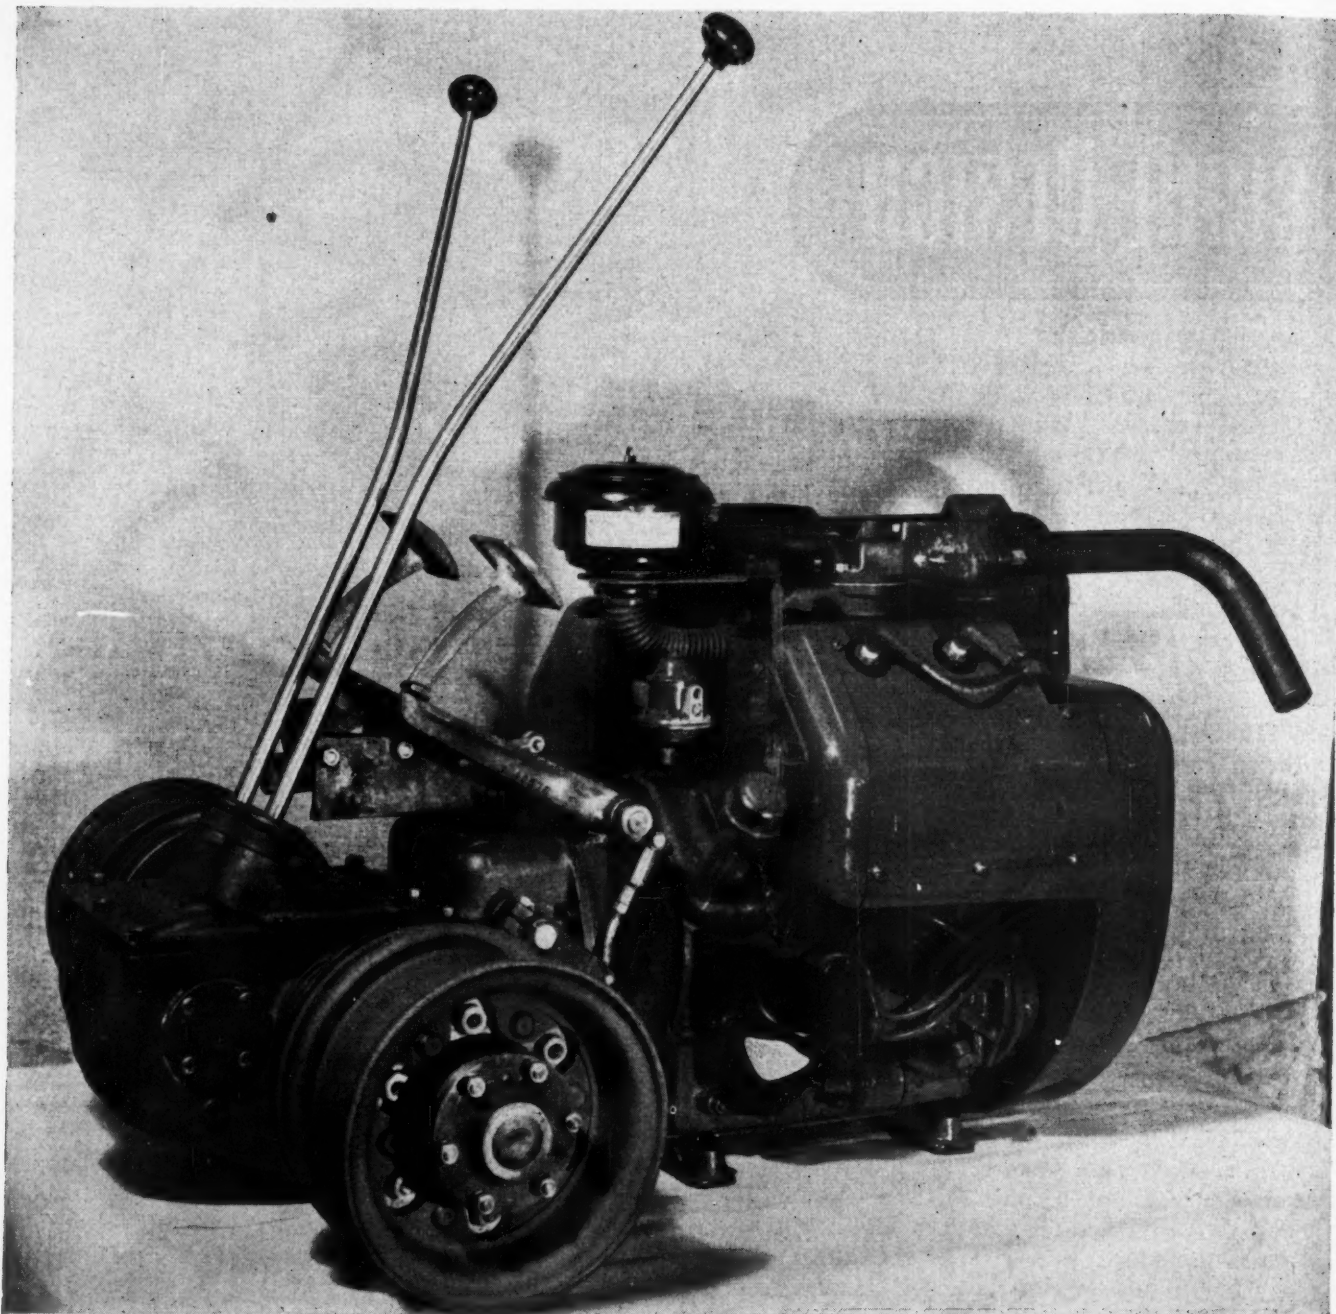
Power unit is V-type air-cooled engine. Space restrictions require that transmission, differential, clutch and flywheel housing be contained in the 12 $\frac{3}{8}$ -inch distance between engine and front axle
